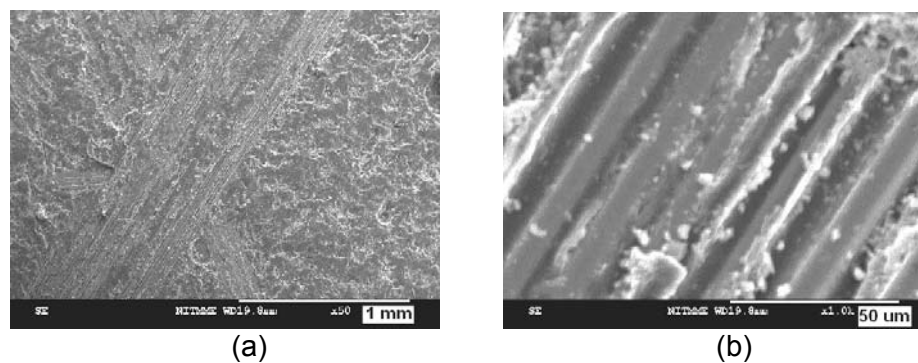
Machined surface of Hand Lay up pipes - best surface finish.
